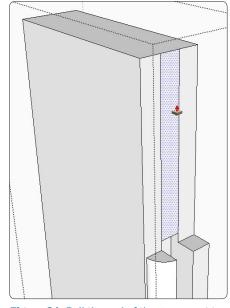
Draw a face to mark the end of the stopped groove in the stile.
